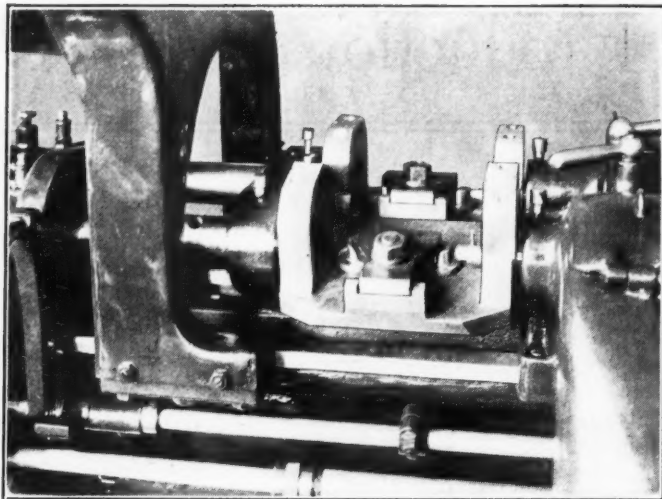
Counter-weight fixture for drilling automobile bracket in deep hole drill
